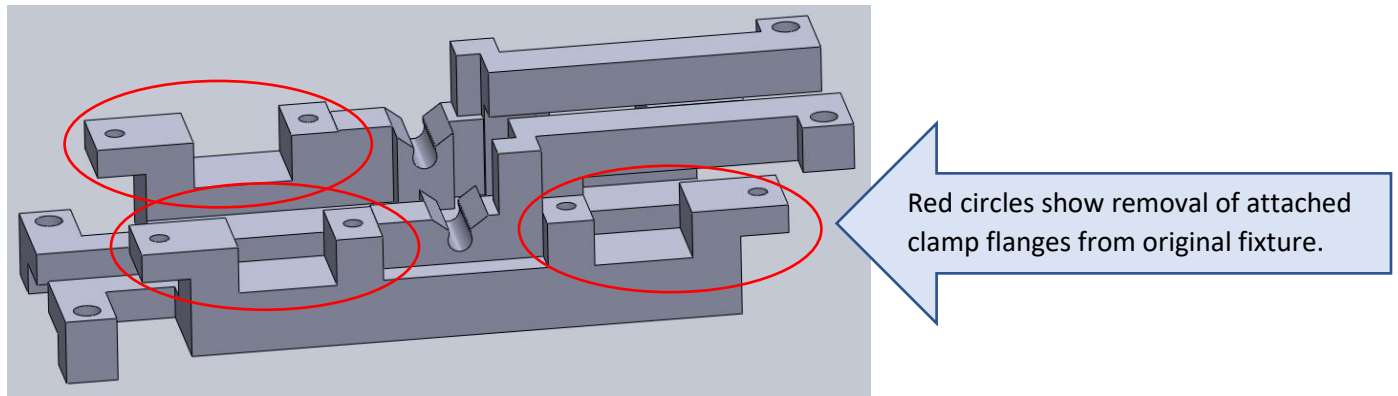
Removal of Clamp Flanges from Previous Motor Fixture
